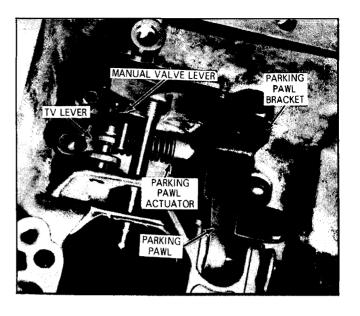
F-58 Inner Control Levers, Parking Pawl and Bracket
